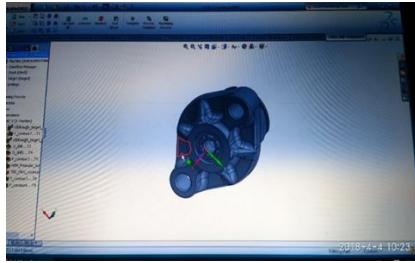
Computer aided manufacturing: CAD is used to manufacture a component
